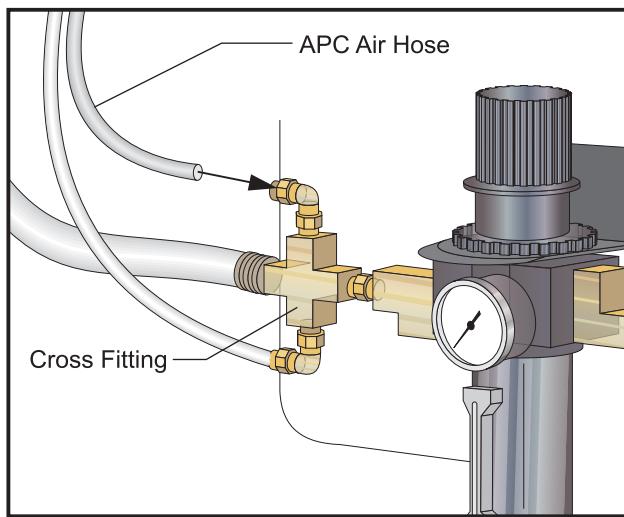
APC air hose connection to VMC air/lube cross fitting.
